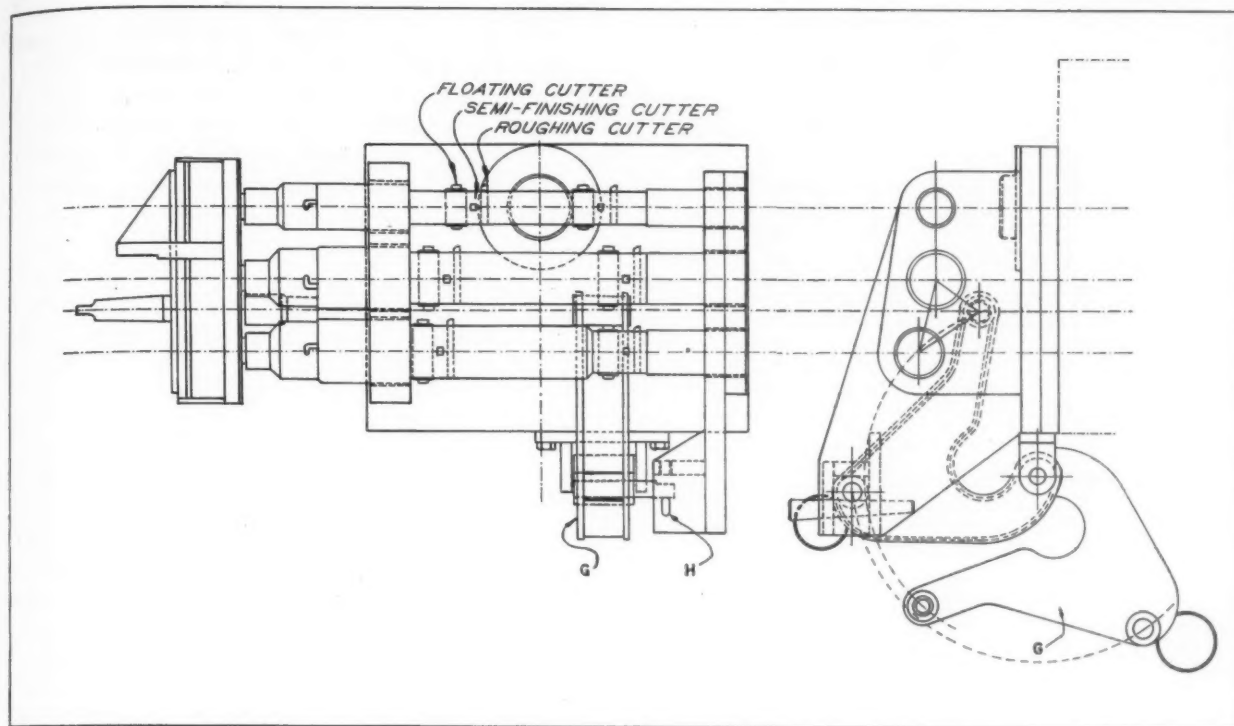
General Arrangement of the Welded Boring Fixture
